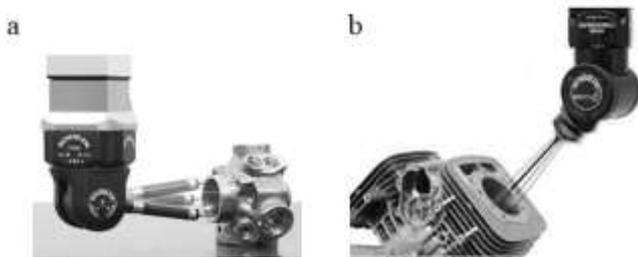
(a) 2-Axis rotary head with trigger probe; (b) 2-axis scanning probe.
